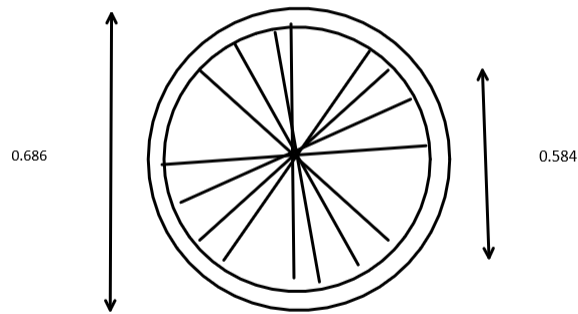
Side view of the wheel with outer and inner diameter dimensions.
